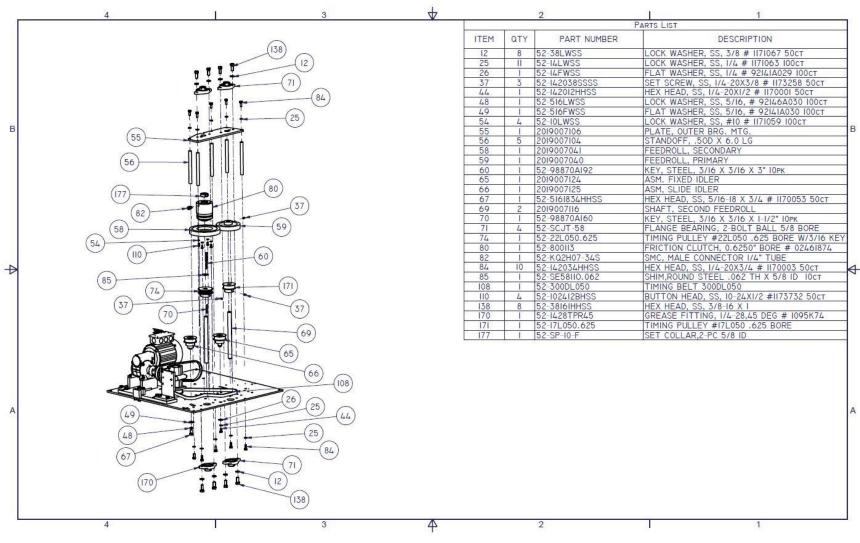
Drawing - Feed Rollers and Pulleys Assembly
